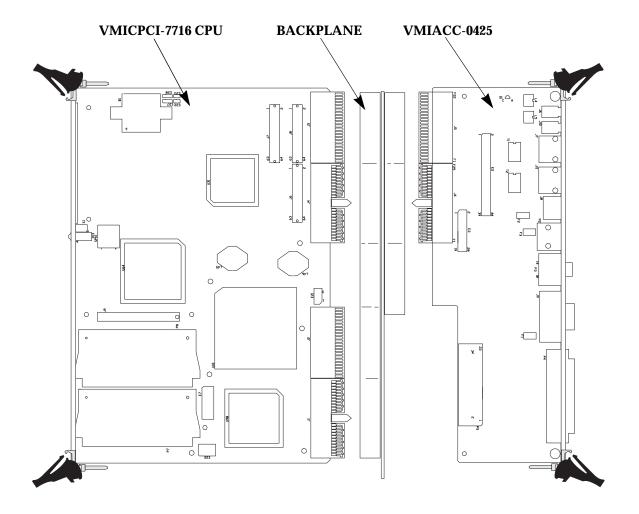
Installation of the VMIACC-0425 Adapter Board with a VMICPCI-7716
